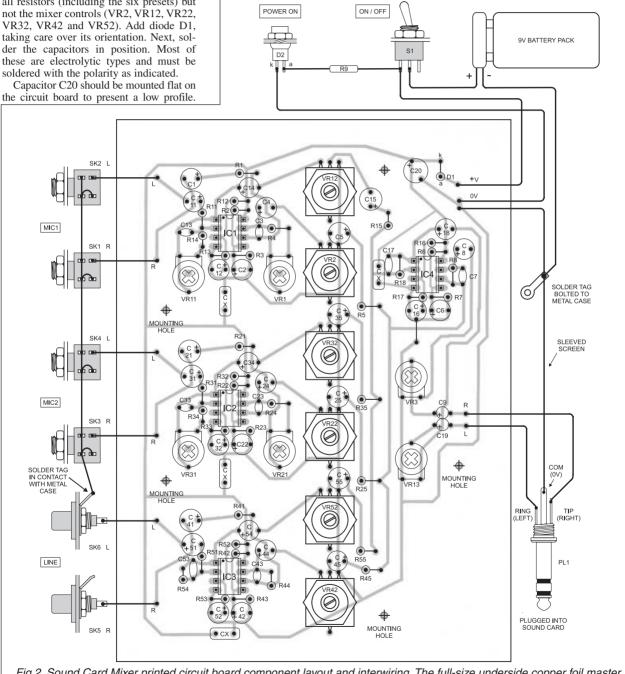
Sound Card Mixer printed circuit board component layout and interwiring. The full-size underside copper foil master is shown on the opposite page. The right and left outputs have been hard-wired to a stereo jack plug. Connections will, of course, have to match your own sound card set-up.
